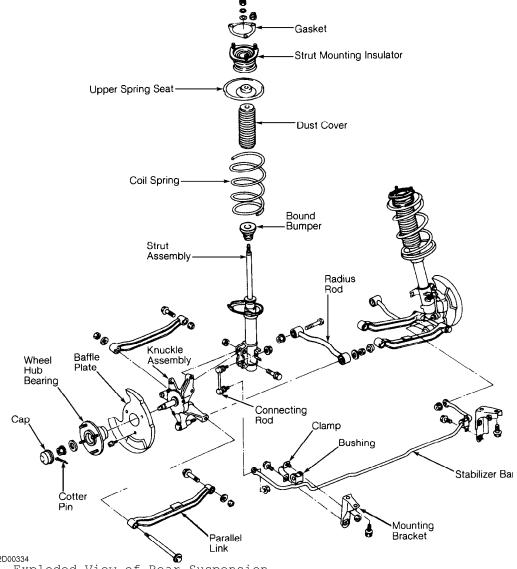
Exploded View of Rear Suspension Courtesy of Nissan Motor Co., U.S.A.
